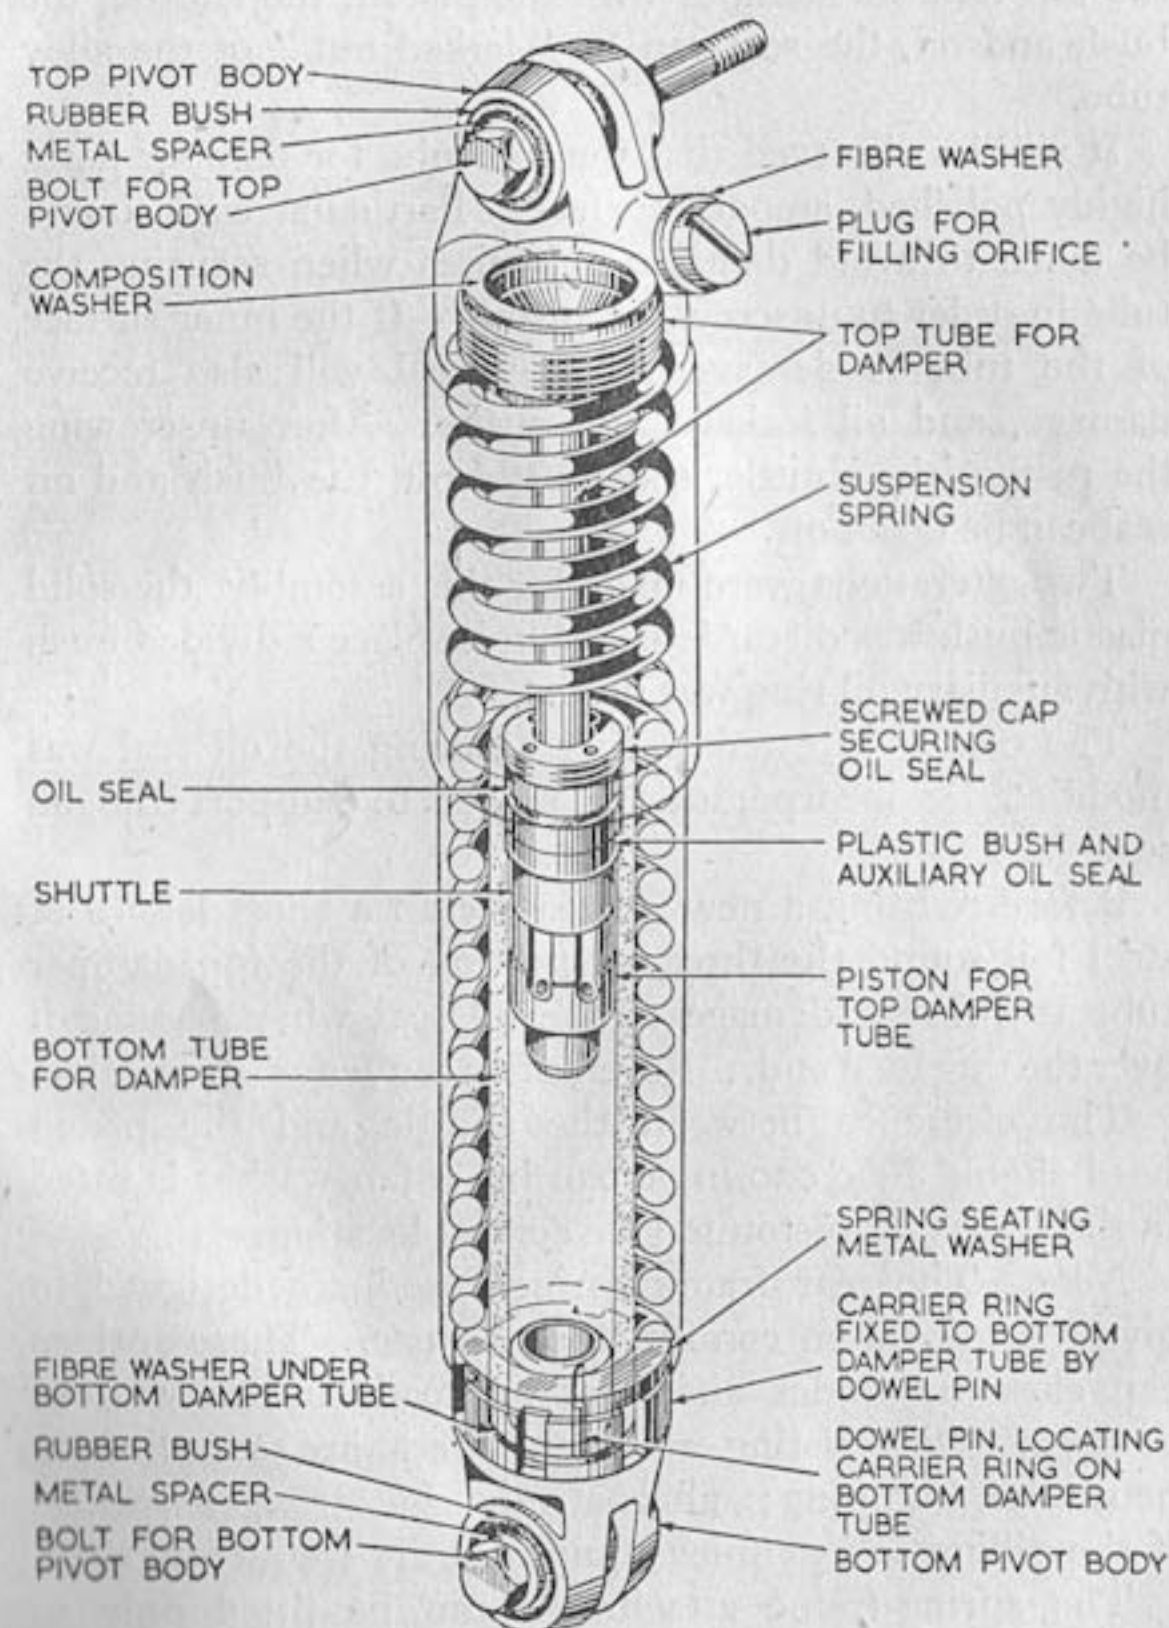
GHOST VIEW OF "TELEDRAULIC" LEG.
